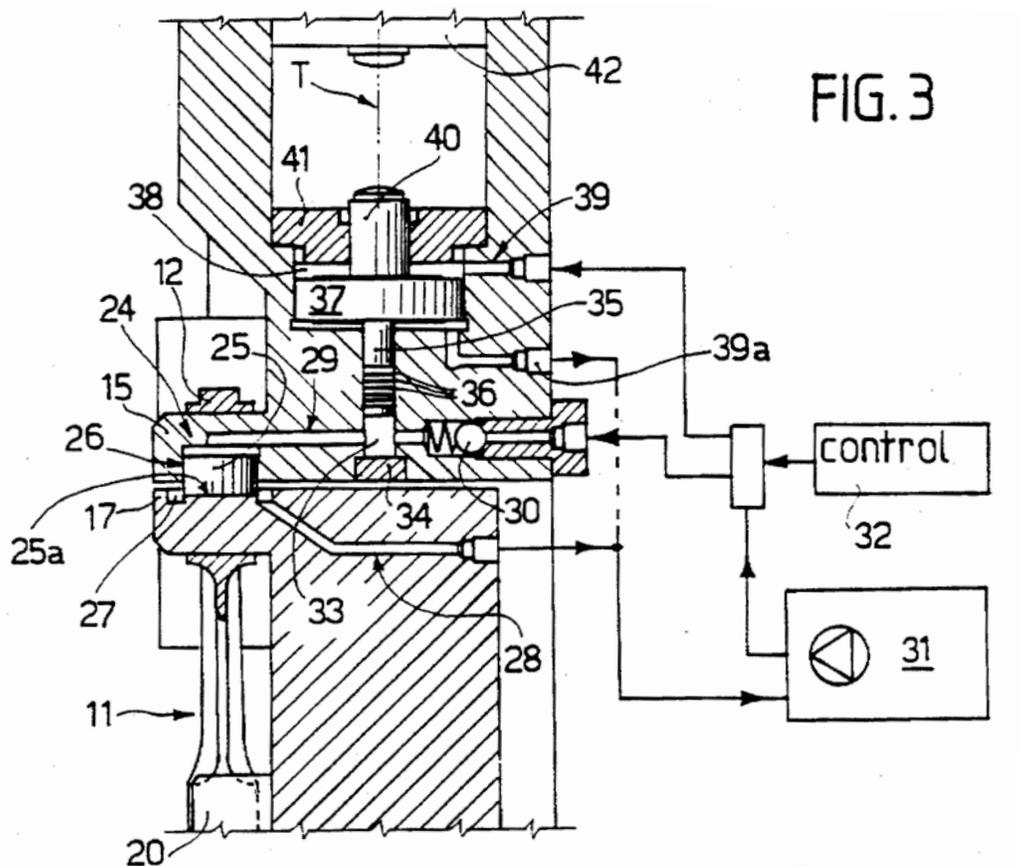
is a sectional view of a portion of machine 10 acting on connecting rod 11. *Id.* at 3:59–60, 3:66–4:1. As shown above, similar to Brovold, hydraulic actuator 24 is interposed between fixed fixture 15 and movable fixture 17 of machine 10 to cause expansion of the fixtures in a diametrical direction against the inner surface of the eye of connecting rod 11 to part cap 12 from the rod. *Id.* at 4:33–40. Cavallo teaches that “parting
